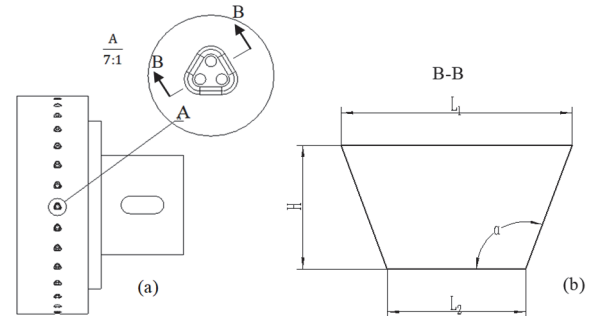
The structure of the shaped hole: (a) enlarged view; (b) section
